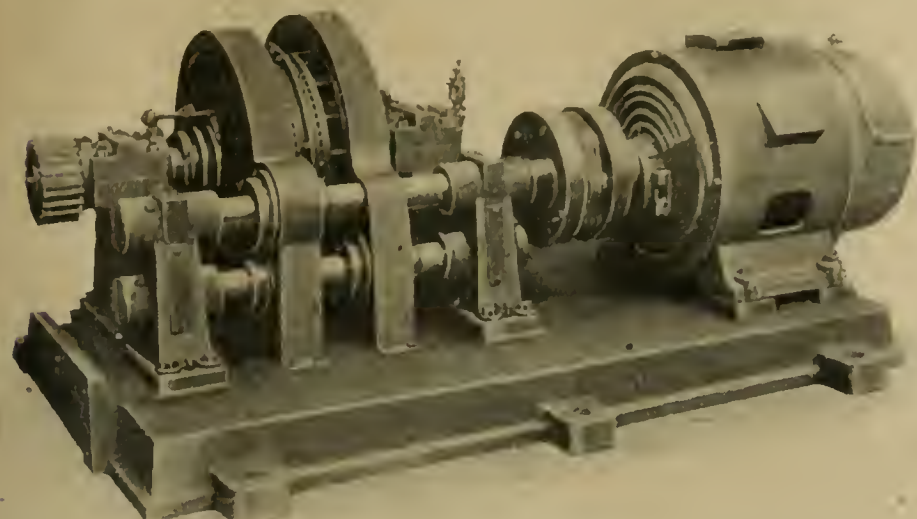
VULKAN REVERSING DRIVE FOR PLANING MACHINES, &amp; CO.
